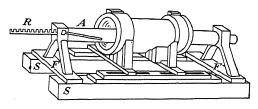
Wilkinson's boring machine. (Mechanical Engineering.)
